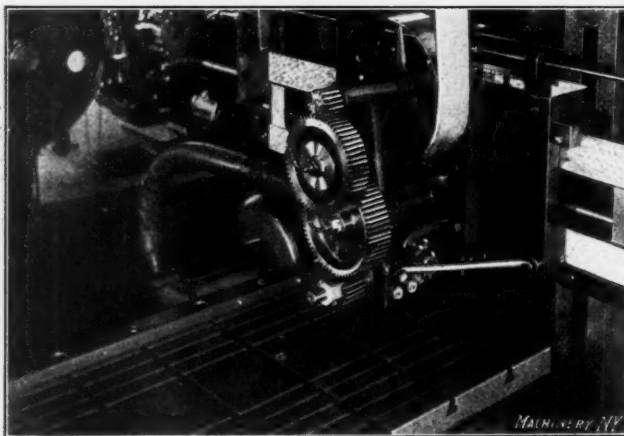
Rack Milling Machine with Individual Chip Exhaust Fan
